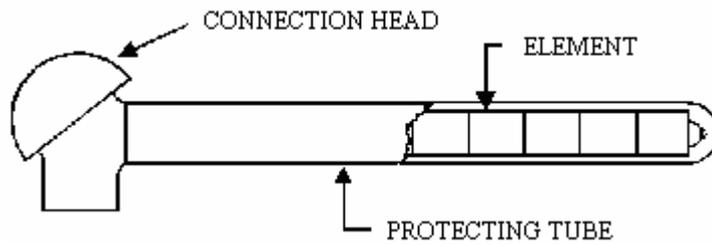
THERMOCOUPLE ELEMENT WITH PROTECTING TUBE AND CONNECTION HEAD
